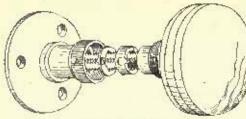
Screwless Fastening Knob. J. Bardsley.
